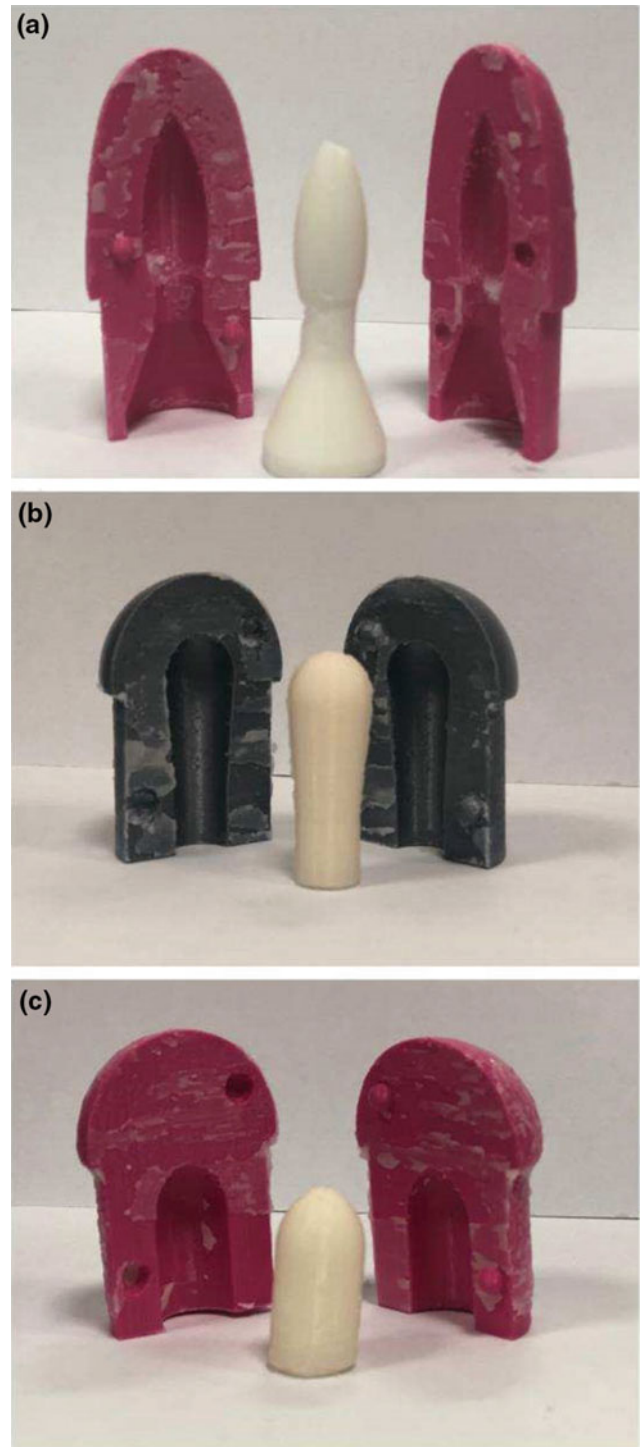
The shape of suppositories obtained after the use of 3D printed moulds: a rocketshaped; b torpedo-shaped; c bullet-shaped
